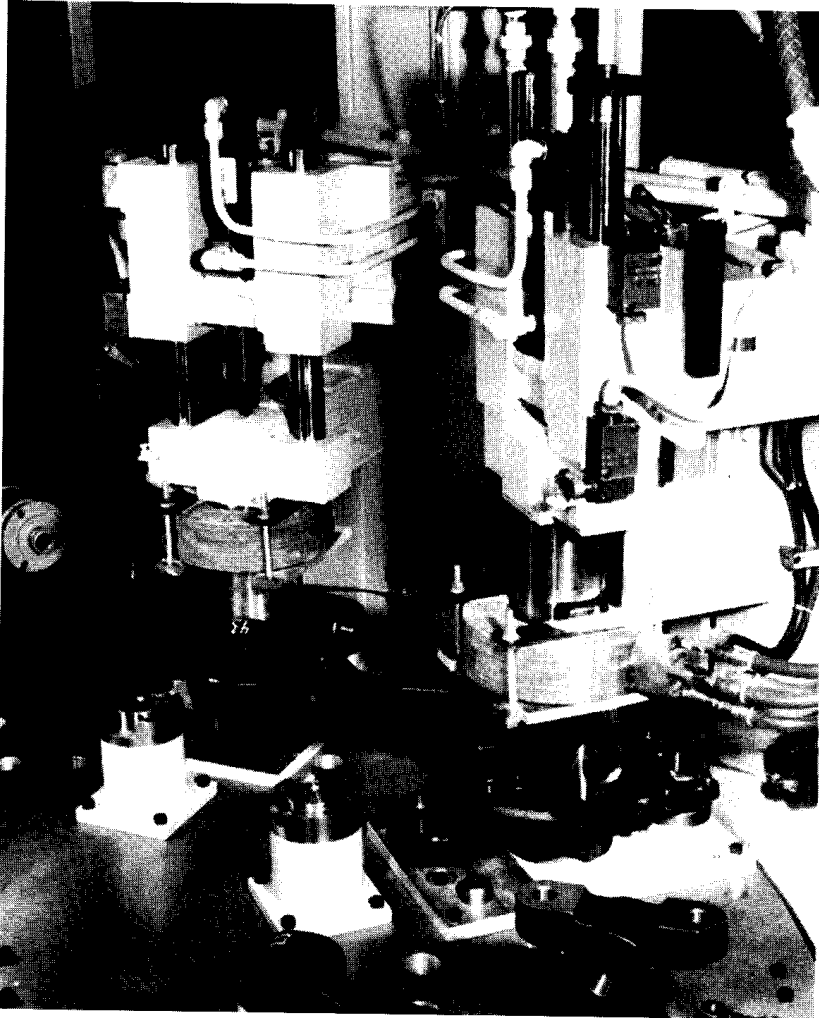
Compact shrink fitting system for assembling truck steering knuckles. Machine consists of eight stations and produces one knuckle every 120 sec. (Courtesy of INDUCTOHEAT, Inc., Madison Heights, MI.).
